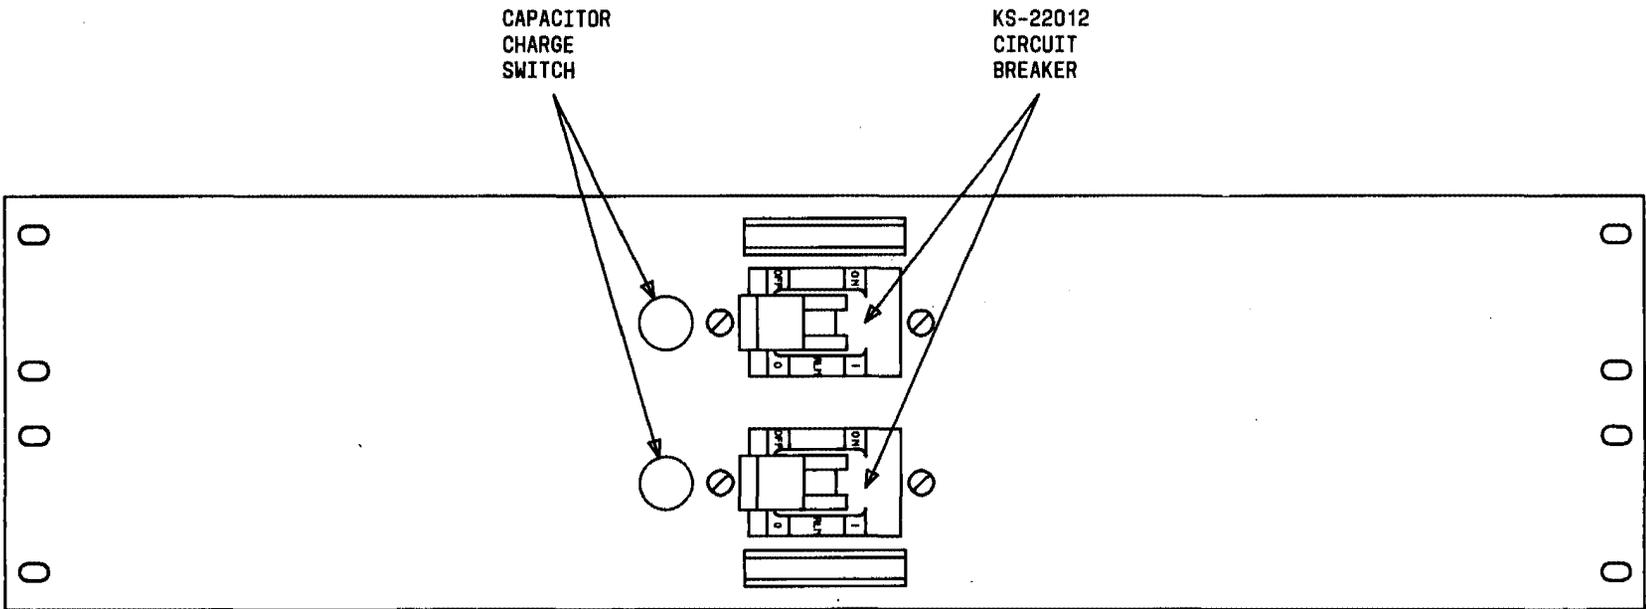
KS-22012 Circuit Breaker Mounted on ED-82835-30, G3, Panel
